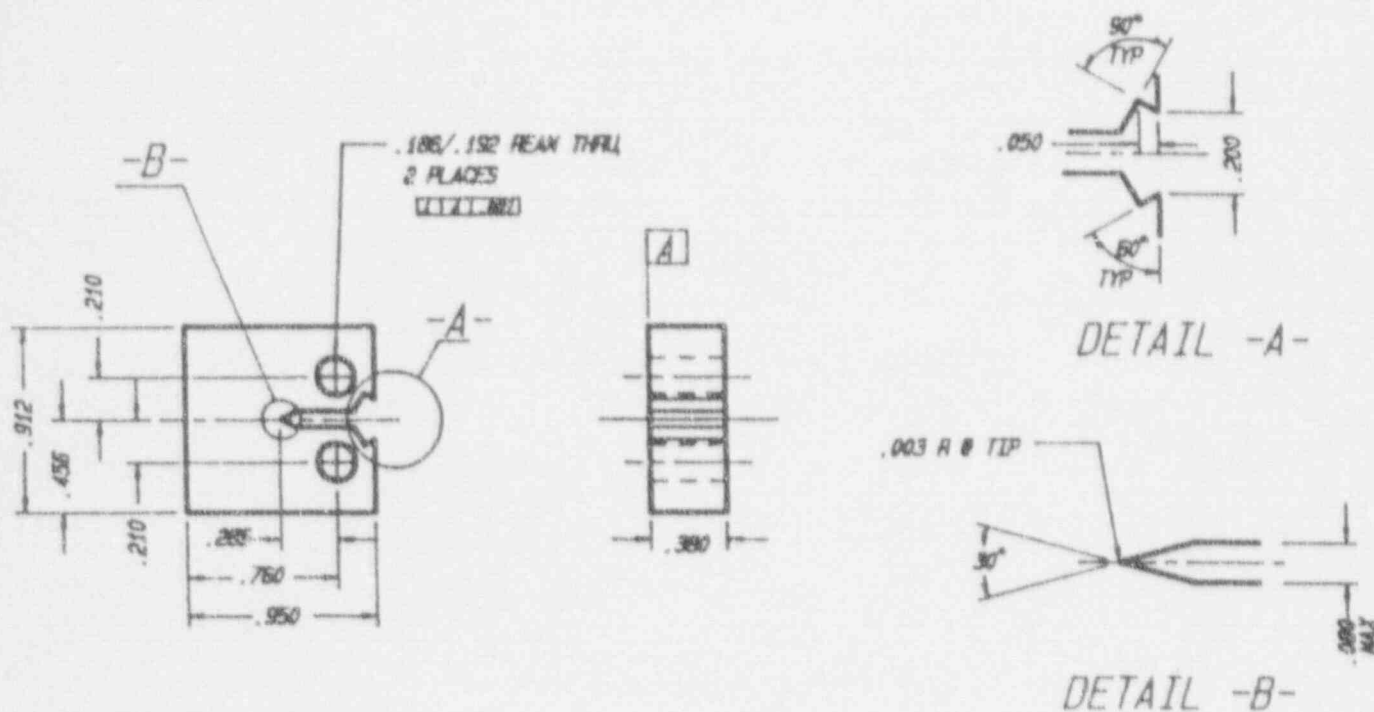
Type C Fracture Toughness Specimen (0.76W).
